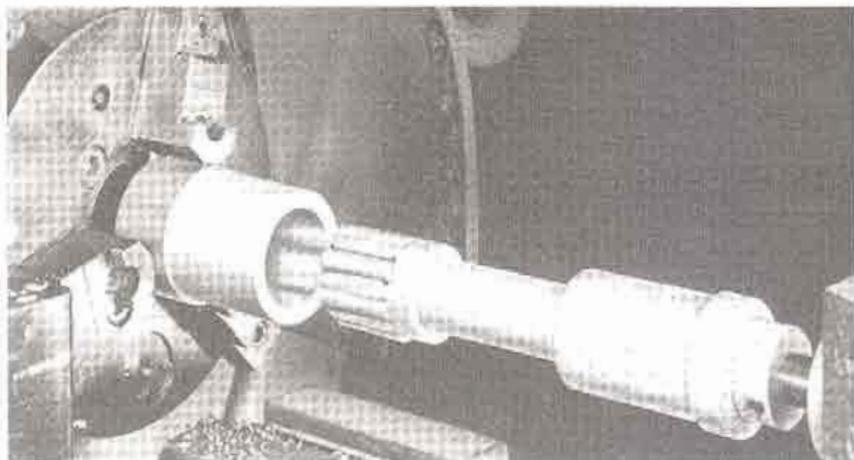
Tool for roller burnishing. The burnishing rollers move outward by means of a taper. (Courtesy of Madison Industries, Inc., Sumter, SC.)
